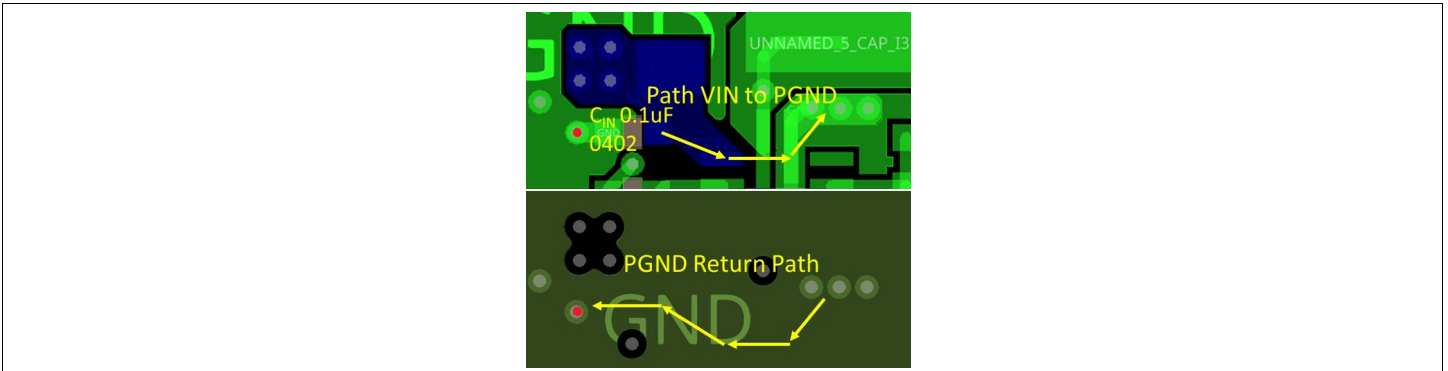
Recommended PCB Layout—2nd Layer HF PGND Return
